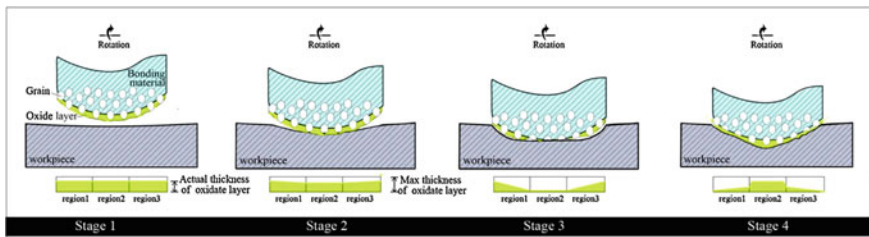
Stages of non-uniform contact between the grinding wheel and bearing raceway [41]
